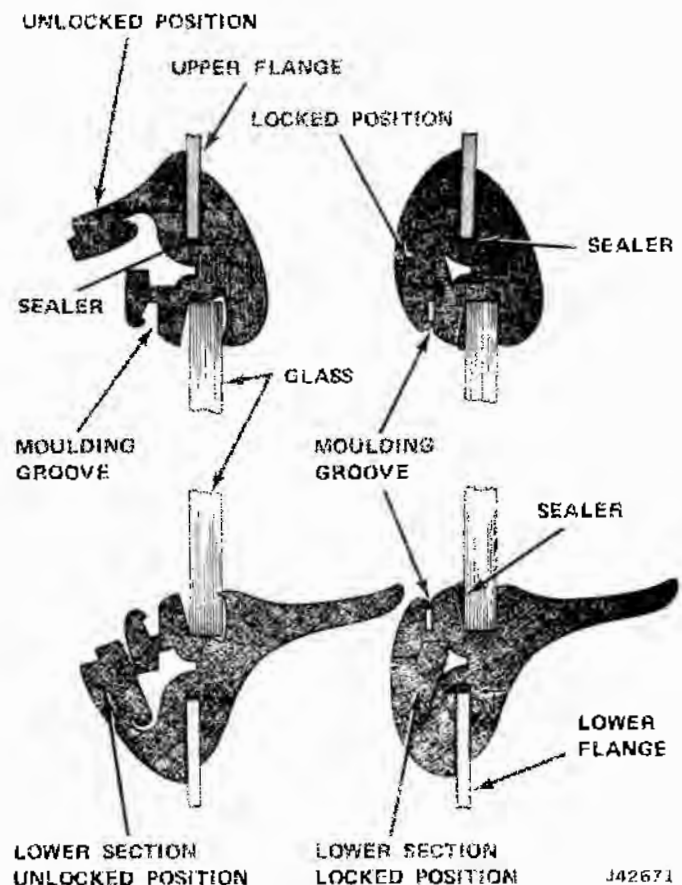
Windshield Weatherstrip Cross-section - Moulding Removed
